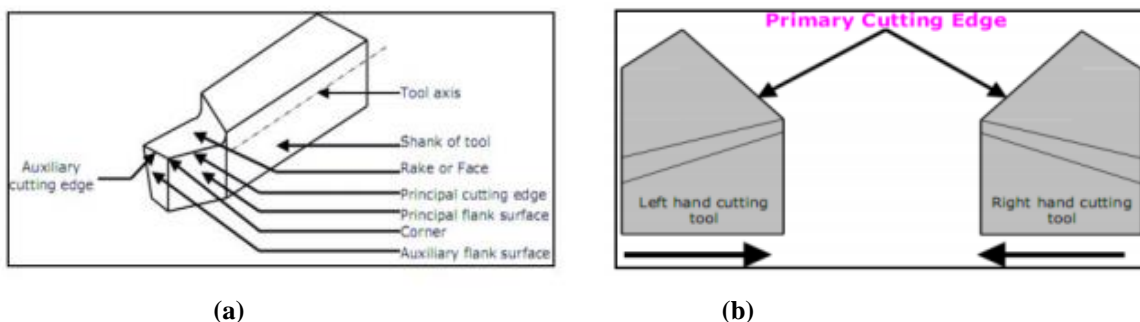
(a) Shows elements of single point cutting tool (b) Left hand right hand cutting tool
